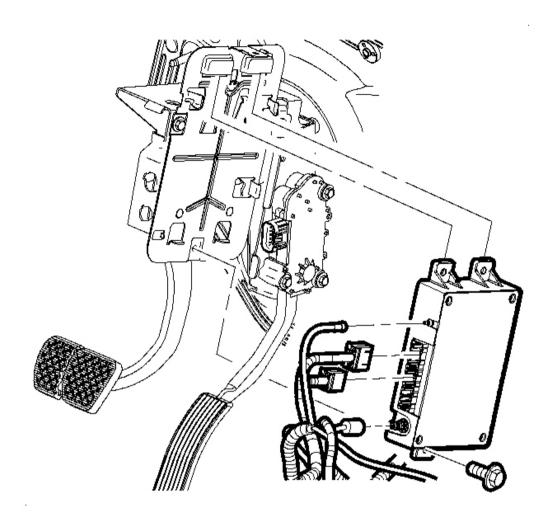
Removing Mounting Bolts & Reposition OnStar Module Courtesy of GENERAL MOTORS CORP.
